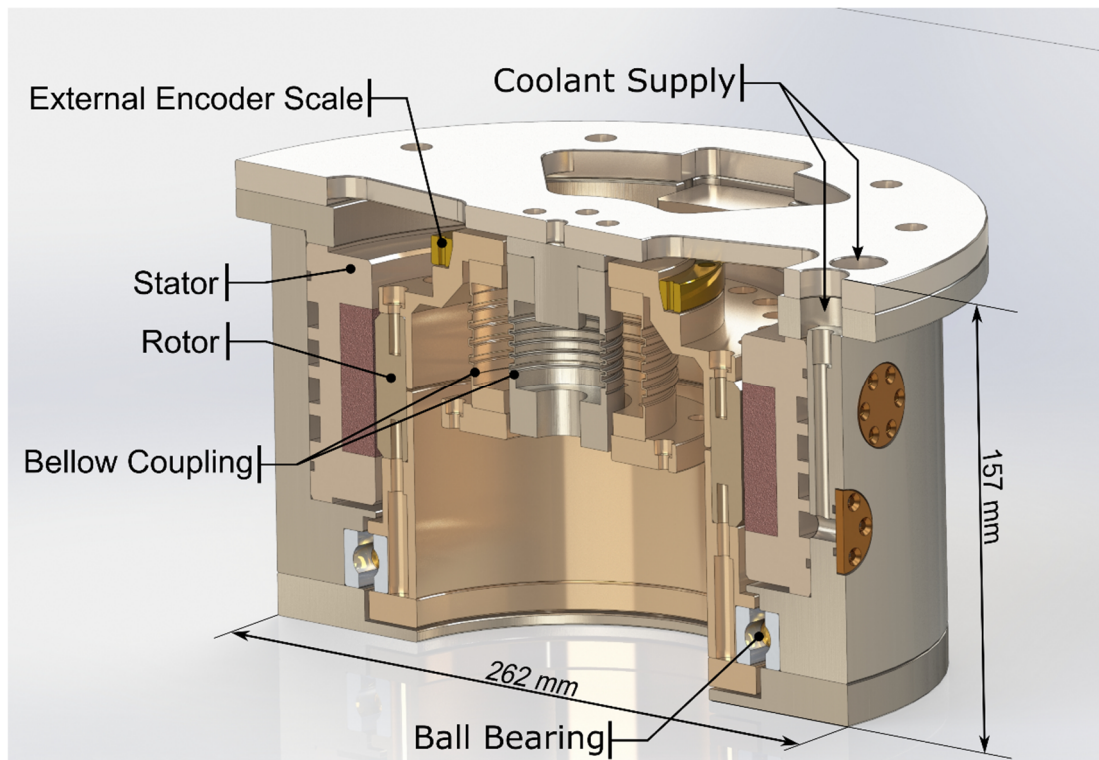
Sectional view of the direct drive torque motor. The external encoder is not used for QEXAFS measurements, but can be used to monitor the motion of the rotor. Both bellow couplings are mounted to a single coaxial rotary feedthrough.
